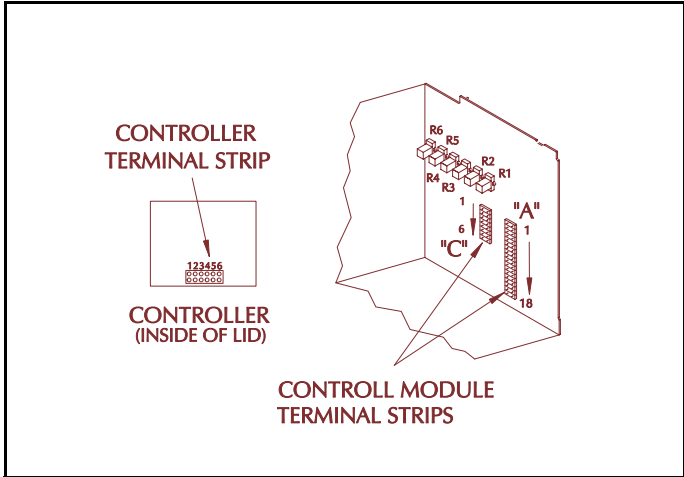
Terminal Strip & Relay Identification, Diesel Model
